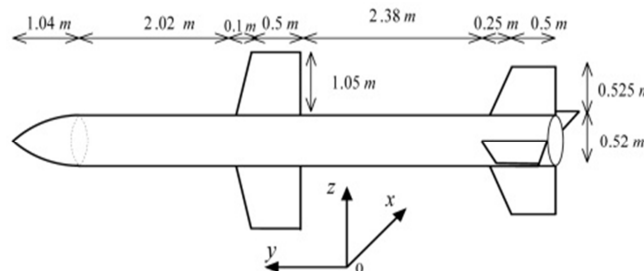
Detailed dimensions of the Tom Hawk Cruise Missile
